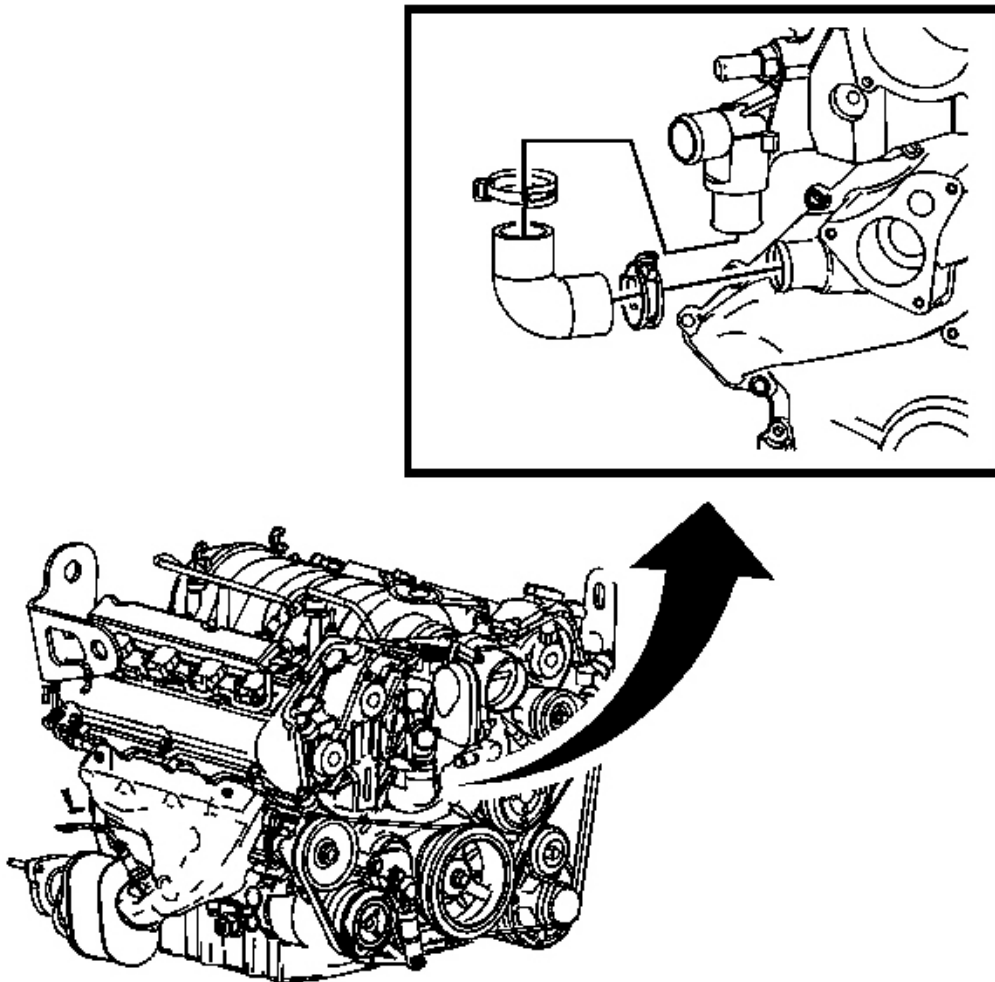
View Of Upper & Lower Coolant Bypass Hose & Clamp
